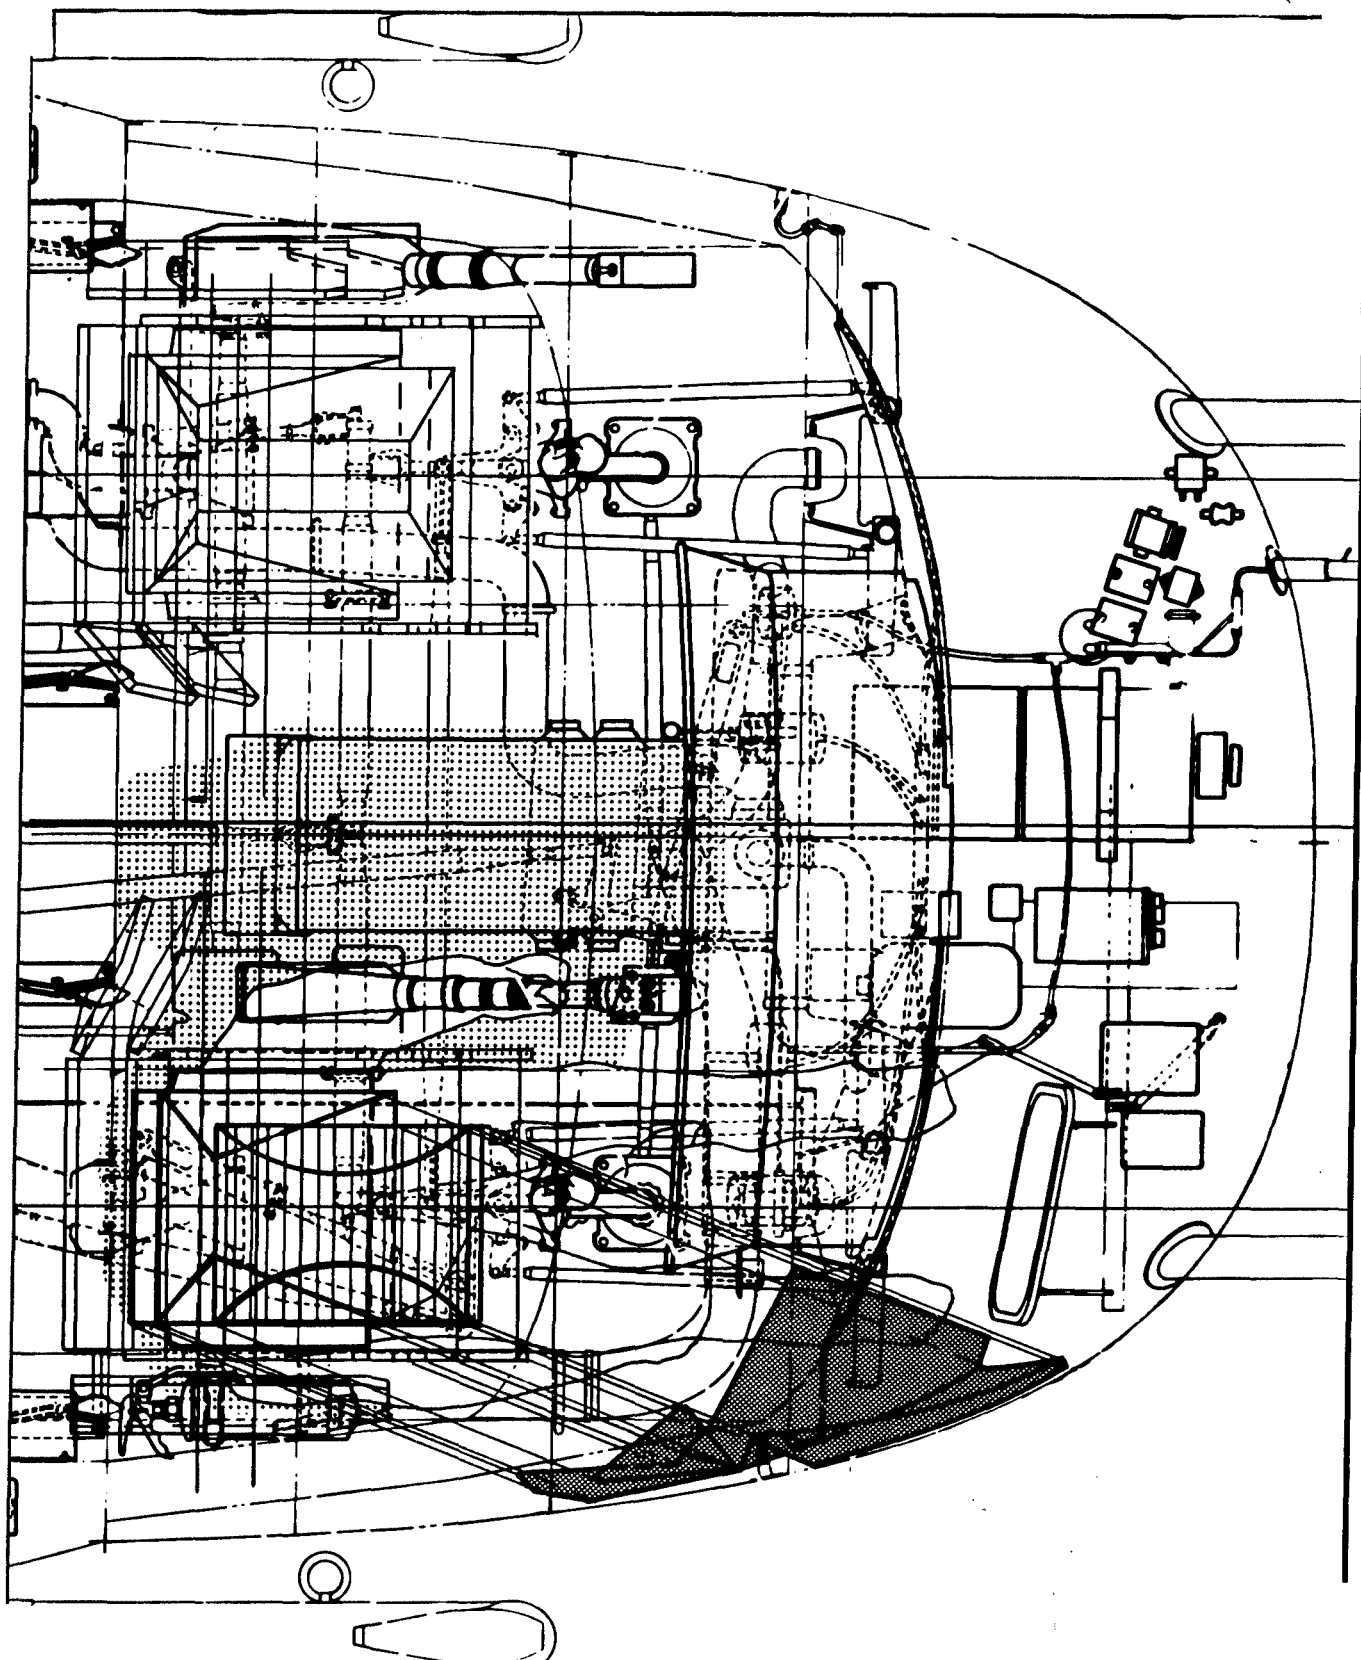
ARMOR CONFIGURATION 1 -- PLAN VIEW 22° AZIMUTH, -45° ELEVATION
